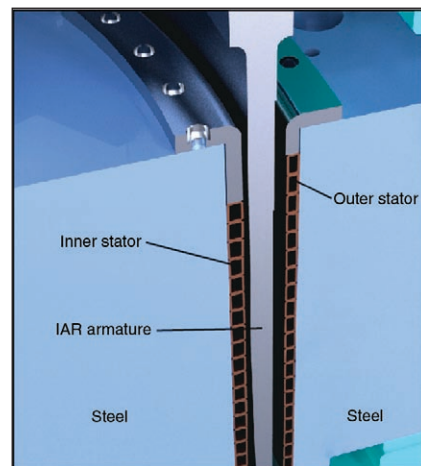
Cutaway view of the Induct-A-Ring shaker.
